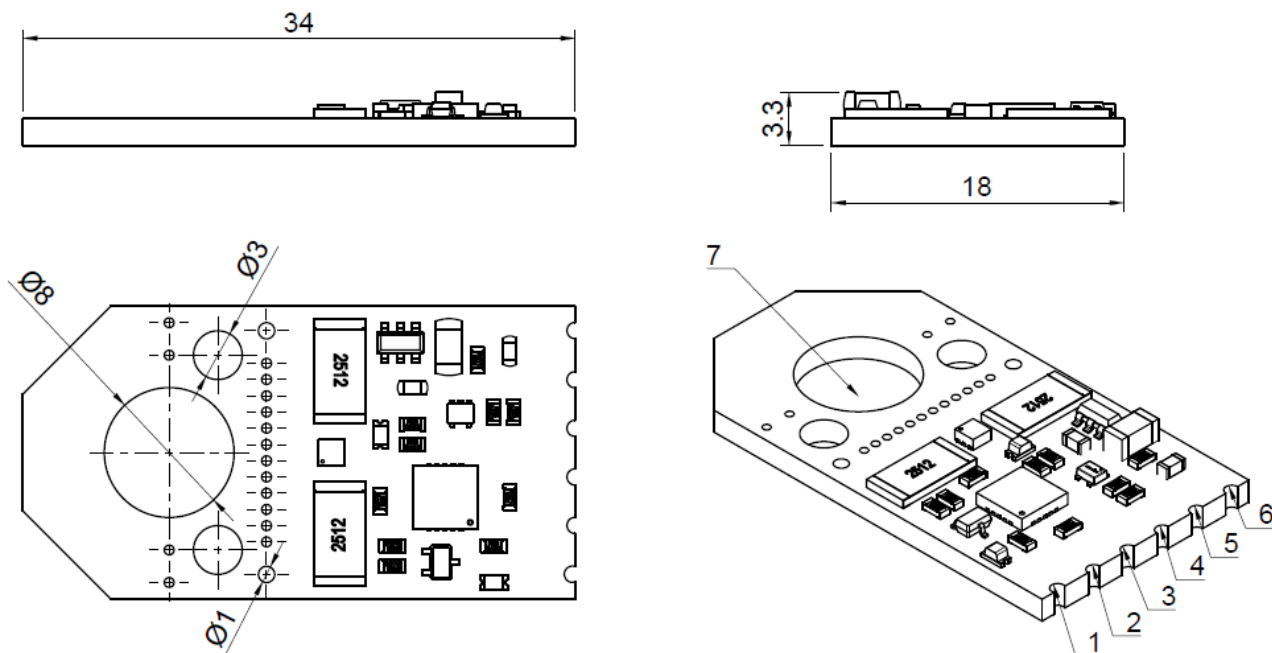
EMUS G1 Cell Module Small (CM021A-8mm) mechanical drawing. All dimensions in millimeters.
